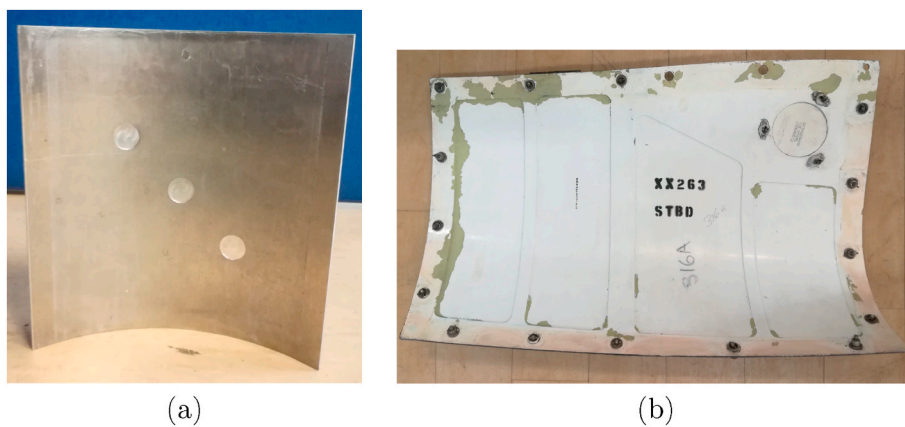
Rear faces of (a) specimen 1 and (b) specimen 2.
